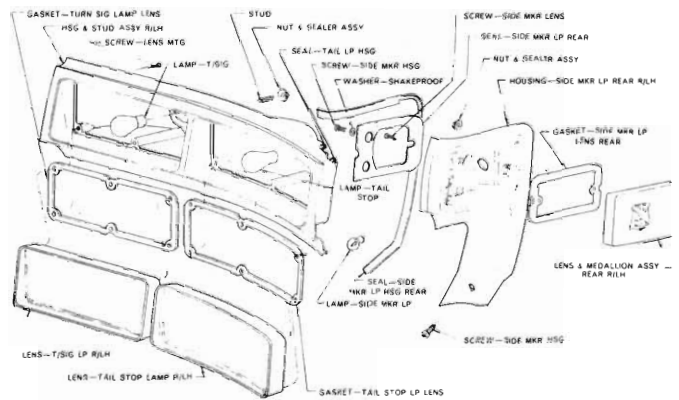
Chrysler tail-stop, back-up and turn signal, and side marker lamp assembly (disassembled view)
